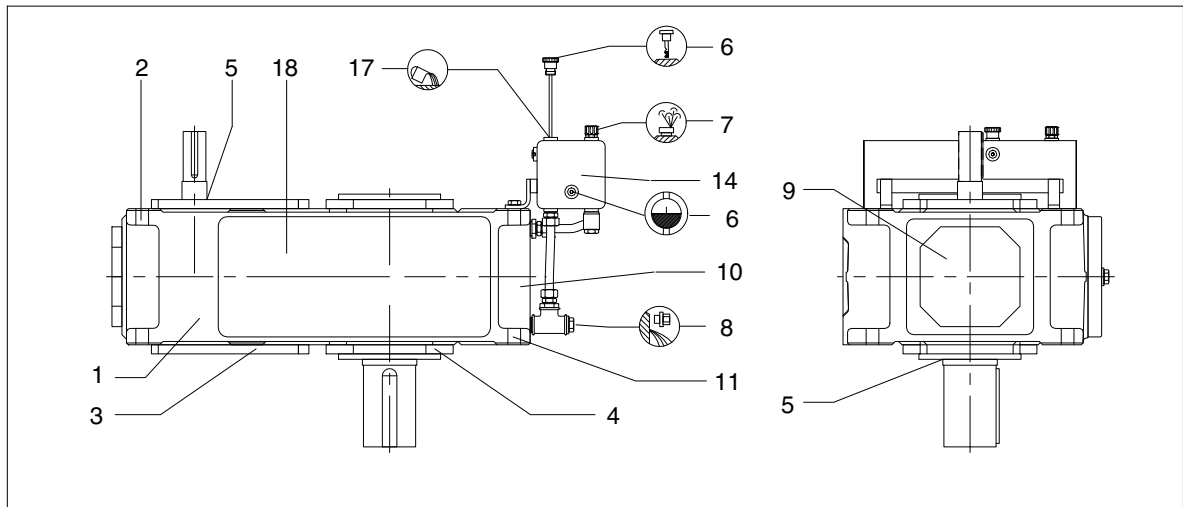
Gear-unit features on gear units type H..V with oil-equalising tank
